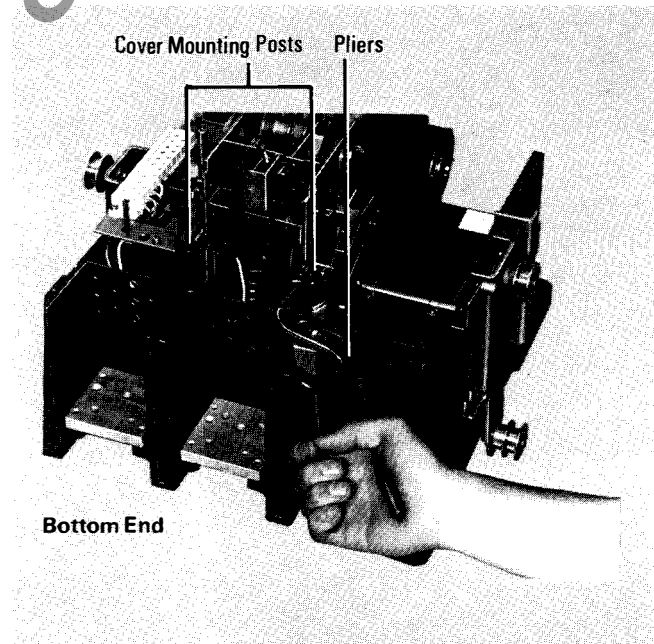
Removal of Front Cover Mounting Posts From a 1600 Amp Breaker.
